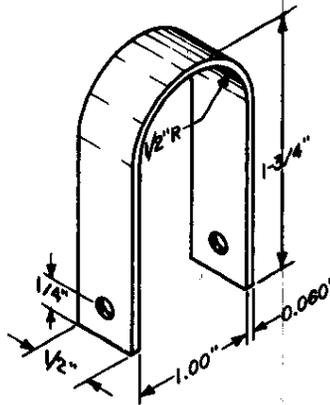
DIMENSIONS OF U-BEND SPECIMEN
